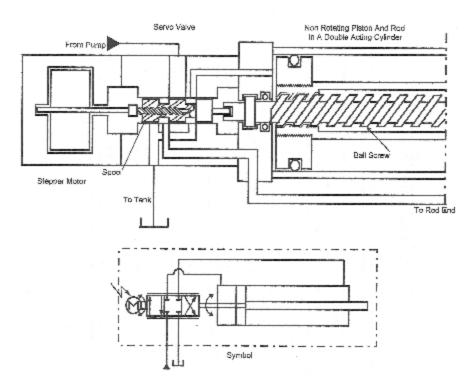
Stepper-motor driven servovalve controlling a hydraulic cylinder.
